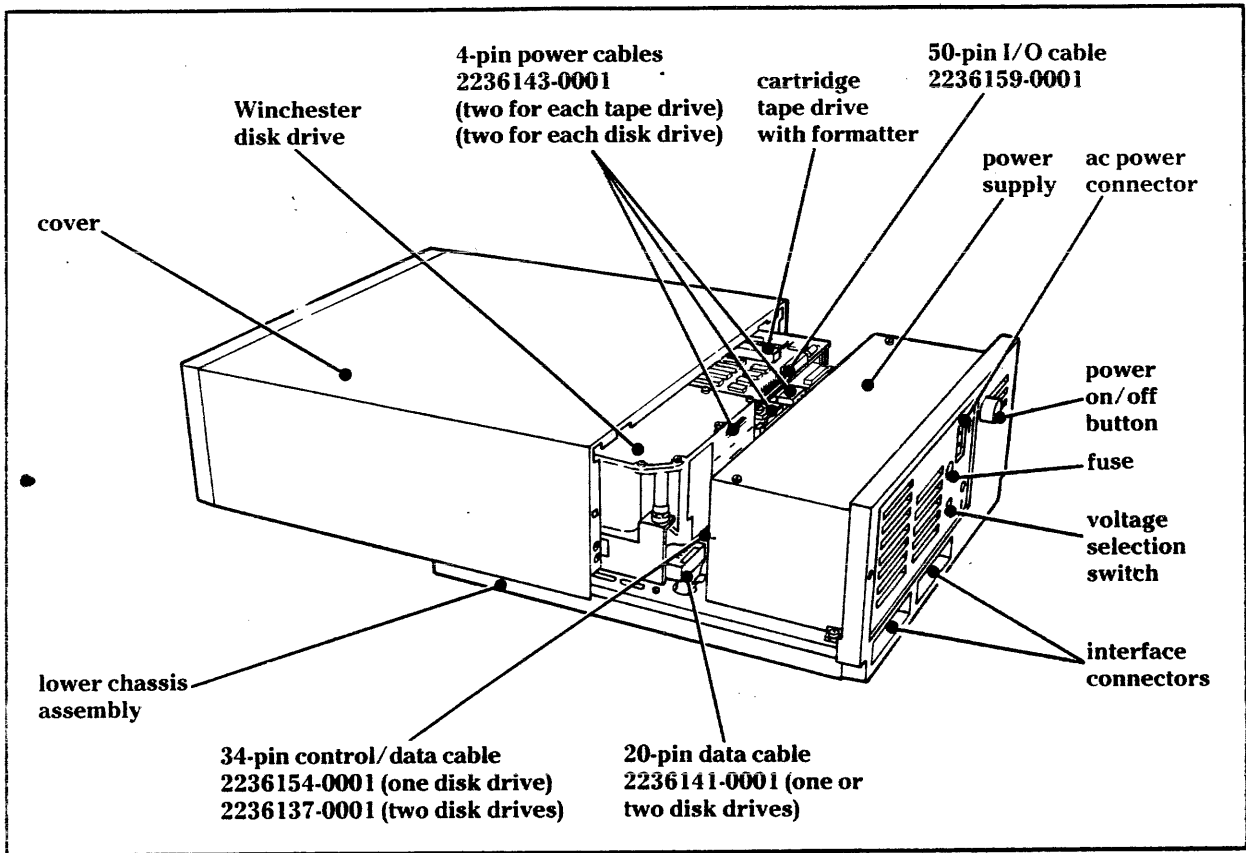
Lower Chassis Assembly Cables With Tape and Disk Drives
